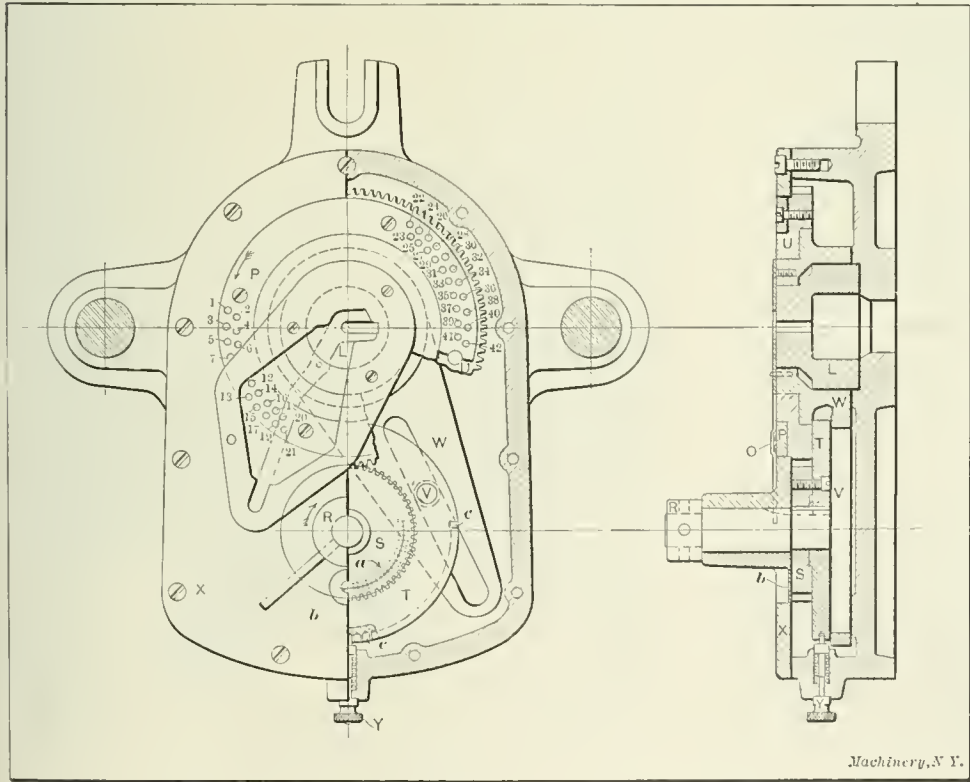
Details of the Mechanism of the Die shown in Fig. 4
